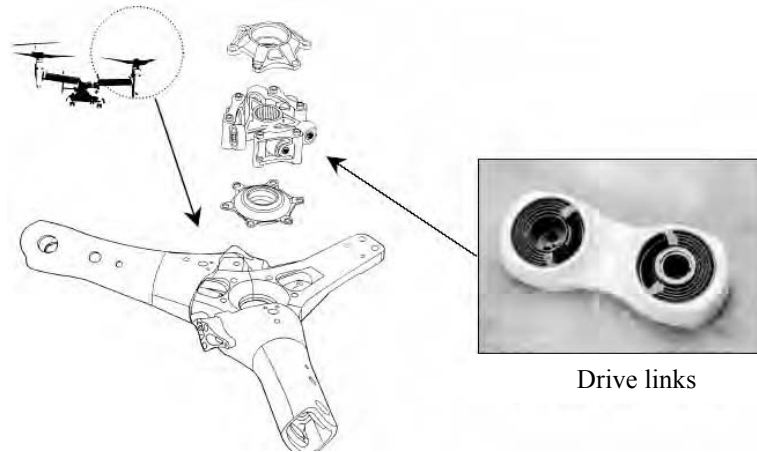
Rotor of a V22 tilt rotor and drive links.
